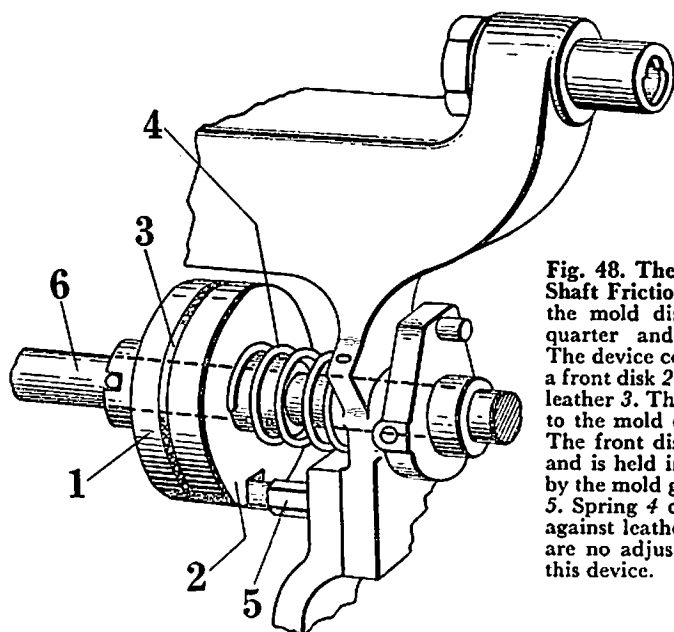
The Mold Driving Pinion Shaft Friction Disk, which steadies the mold disk as it completes its quarter and three-quarter turns. The device consists of a back disk 1, a front disk 2 and a circular piece of leather 3. The back disk 1 is pinned to the mold driving pinion shaft 6. The front disk 2 is free on shaft 6 and is held in a stationary position by the mold gear arm support screw 5. Spring 4 constantly urges disk 2 against leather 3 and disk 1. There are no adjustments to be made on this device.
